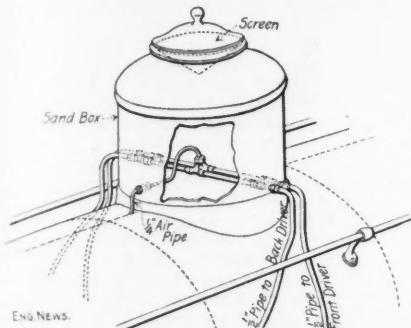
Houston Sanding Apparatus on Locomotive for the A., T. & S. F. Ry. Western Railway Equipment Co., Manufacturers.
